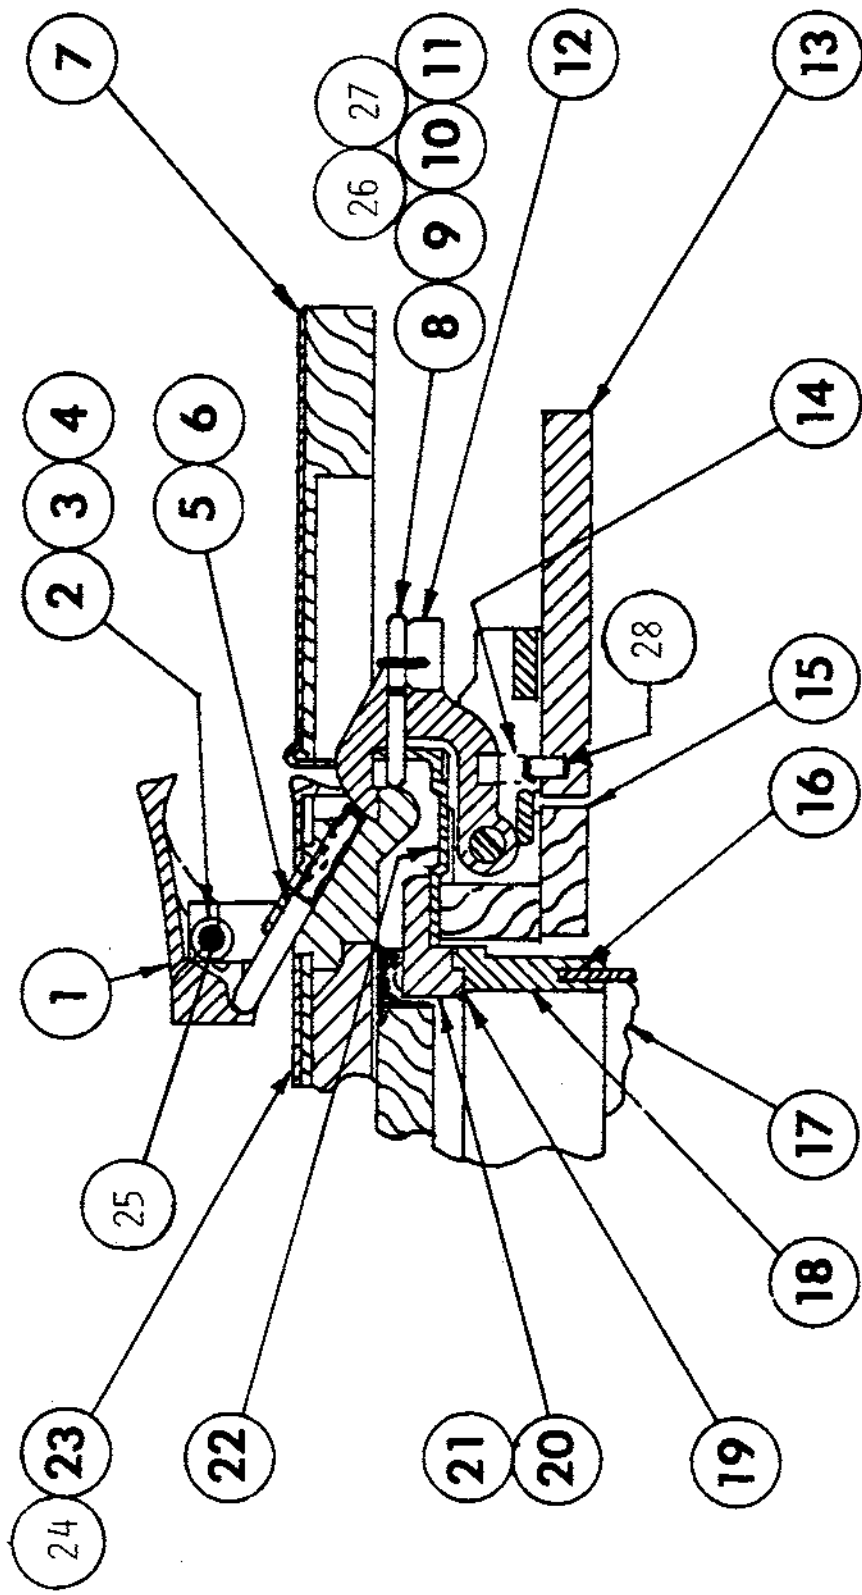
RC-5 Parts Location, Cabinet, Right Side View
